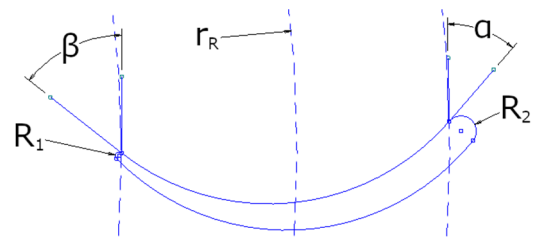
Main view and geometric parameters for the rotor blades of the preliminary geometry.
